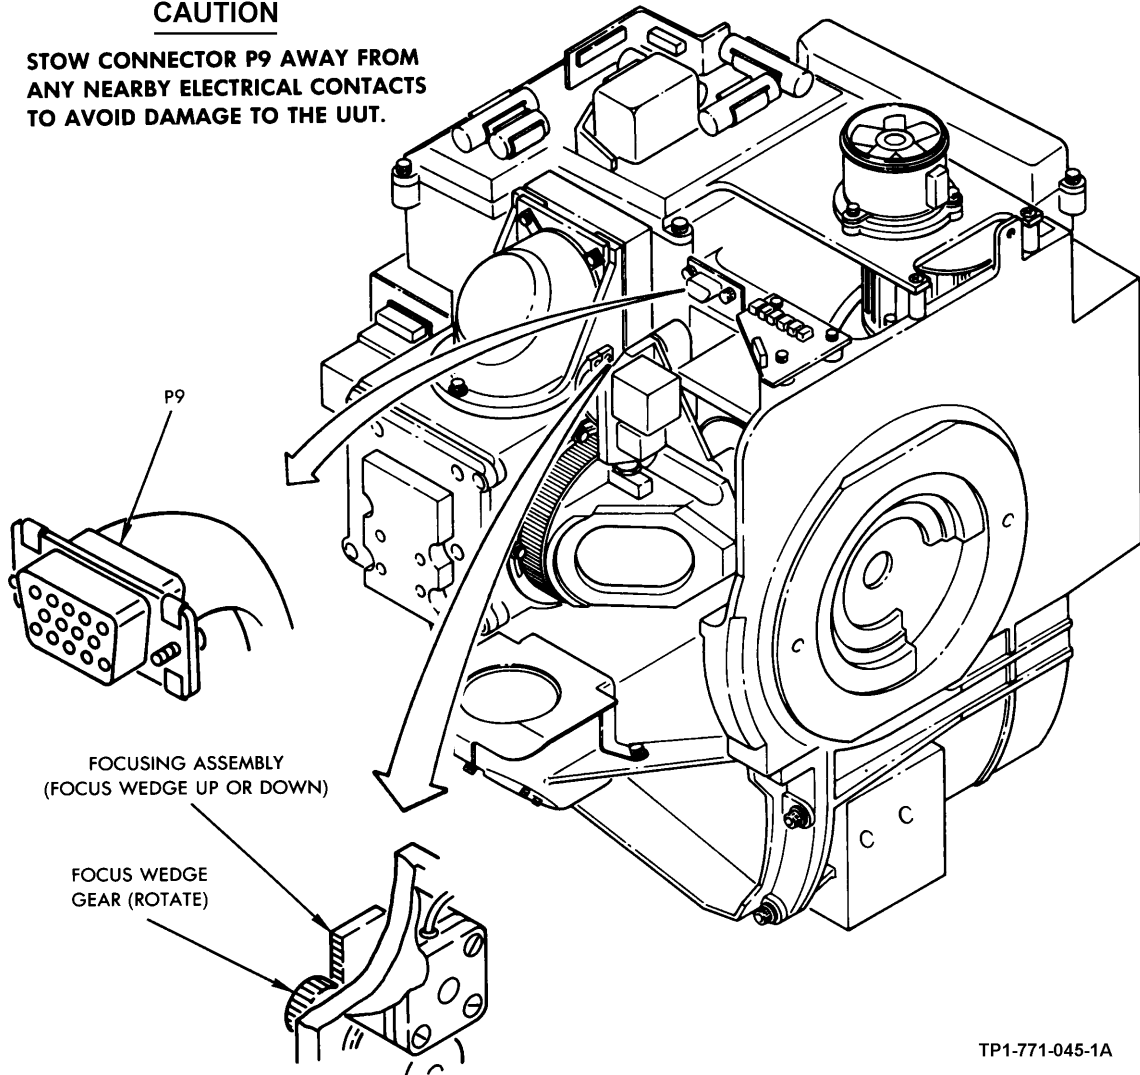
Imager Assembly Adjustment (Sheet 2 of 2)
